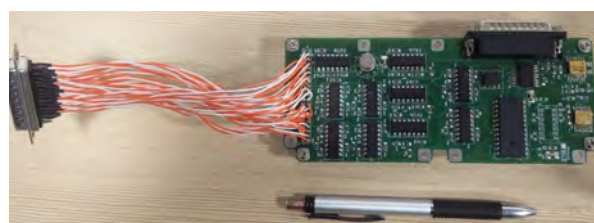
Engineering Model PCB of ChaSTE Front - End electronics
